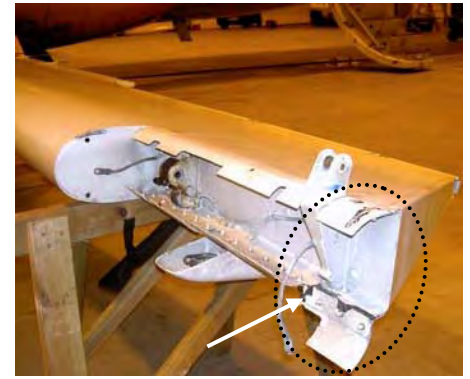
Damage to the elevator's leading edge fairings close to the tail fin
